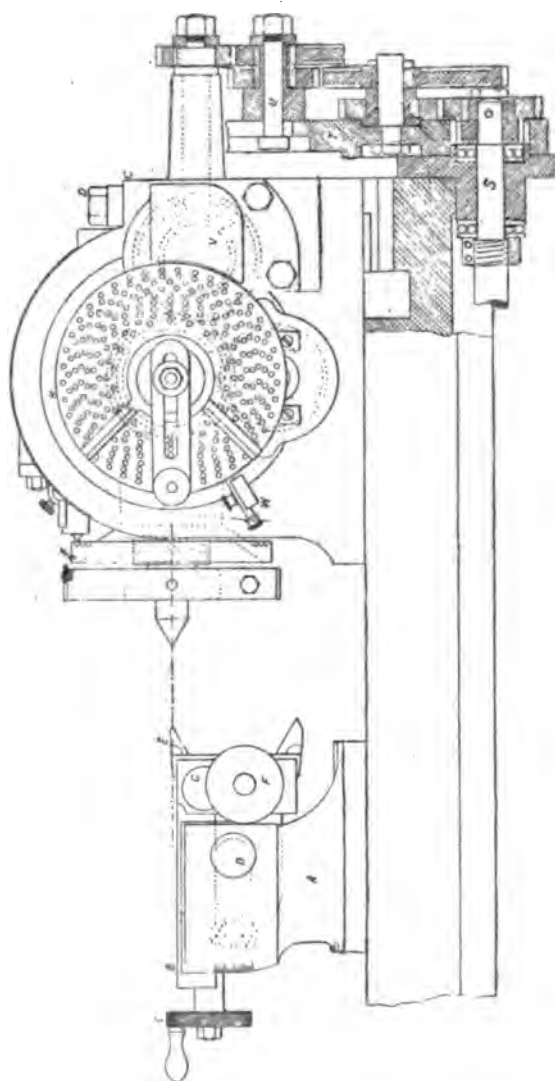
Dividing Head, and Tailstock. Longitudinal Elevation.
